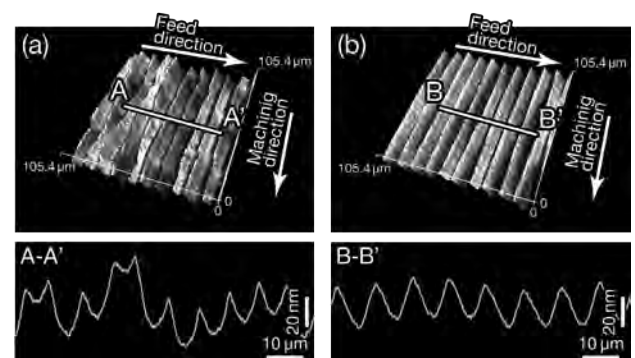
Surface topographies of NiP after machining using (a) nontextured tool, and (b) textured tools
